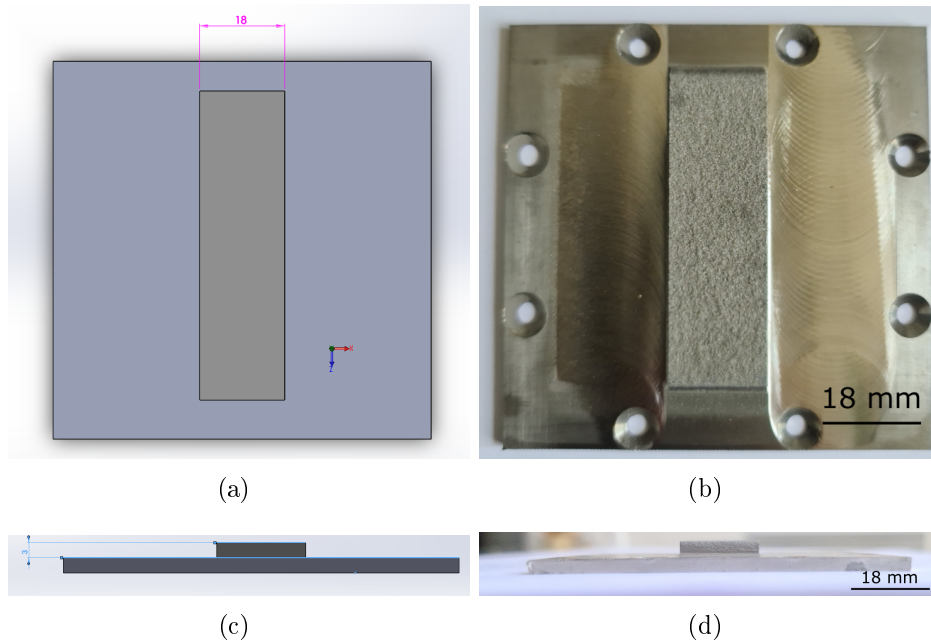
(a) CAD of milled sample from top view, (b) CAD of milled sample from side view, (c) actual milled sample from top view, (d) actual milled sample from side view.
